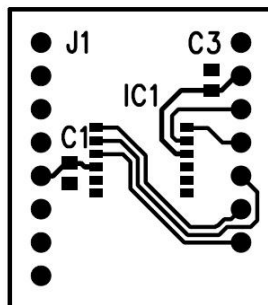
SCA8X0/21X0/3100 PWB Top Layer Layout.
